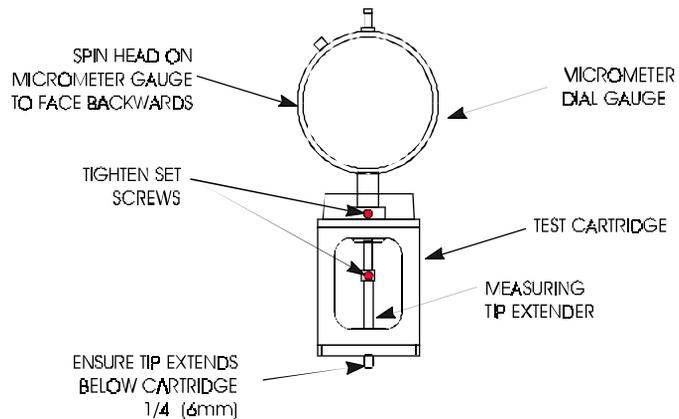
Setting Up Tools from Height Gauge Kit.
